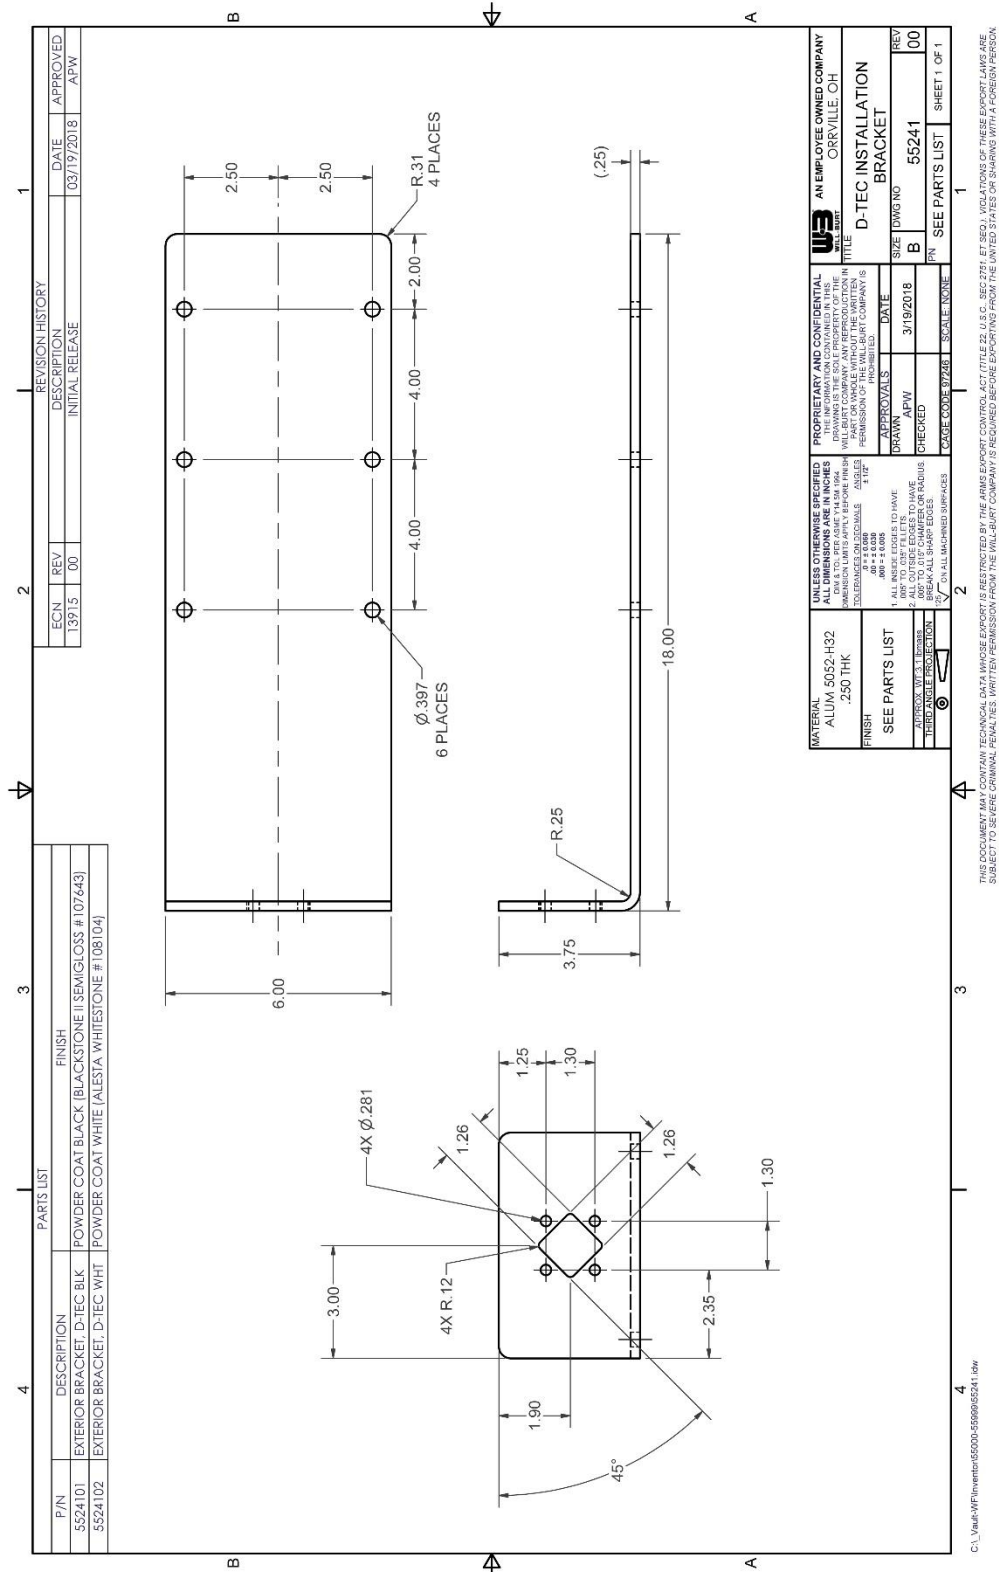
Installation Bracket Dimensions (Measurements in Inches [Measurements in Millimeters])
